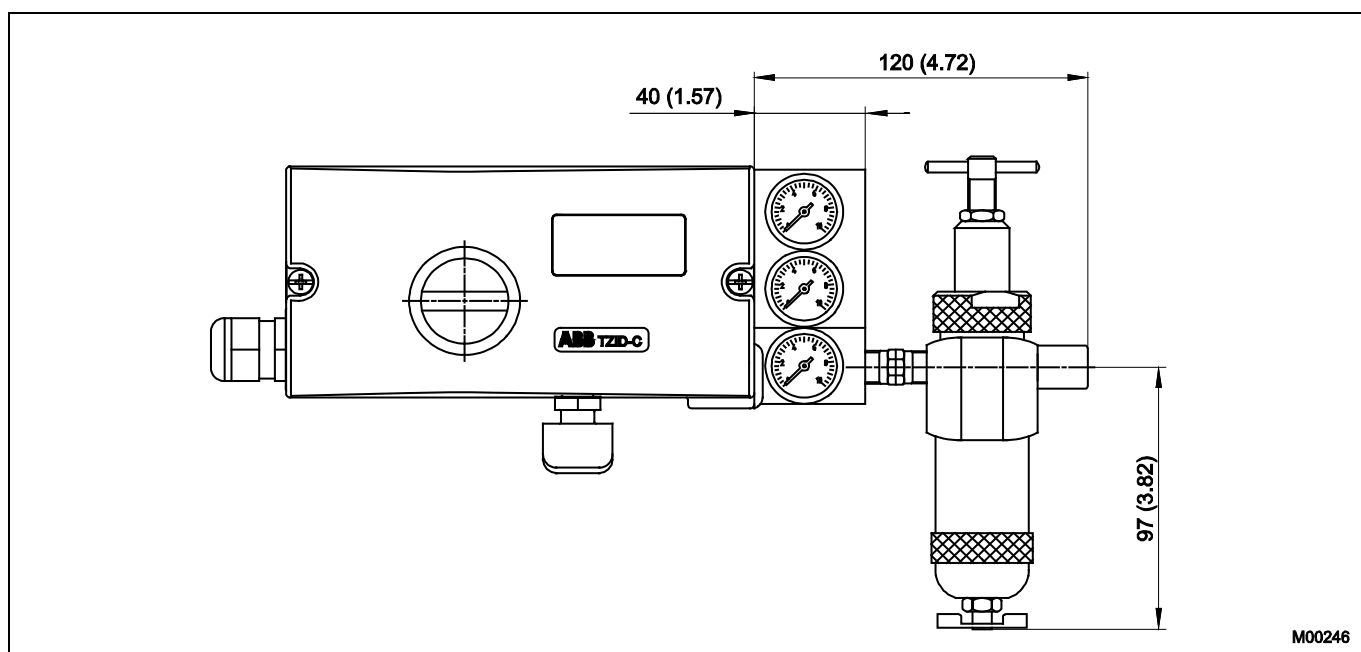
Positioner TZIDC with pressure gauge block and filter regulator
